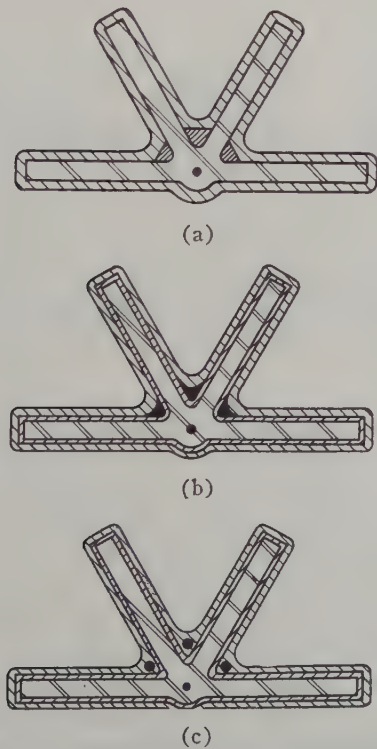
Methods of increasing thickness of deposit in corners; (a) shaped metal inserts, (b) packing by solder, silver powder, amalgams or sprayed metal, (c) drilling out and plugging.
